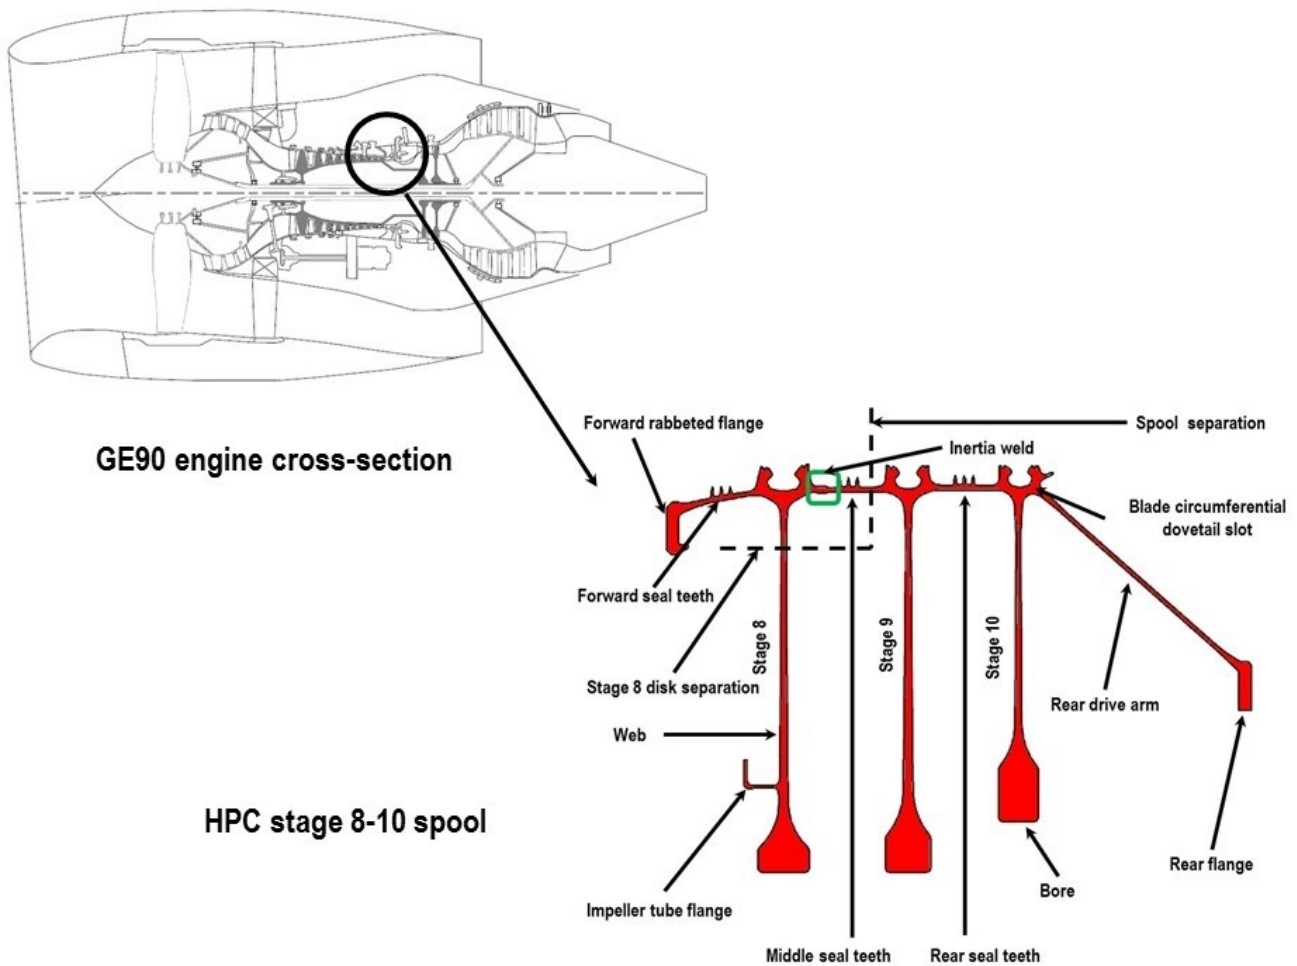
GE90 engine cross-section with the locations of the HPC stage 8-10 spool separation and stage 8 disk separation.
